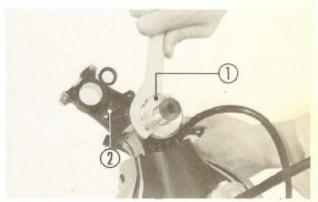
① Steering head bearing adjusting nut ② Steering stem
